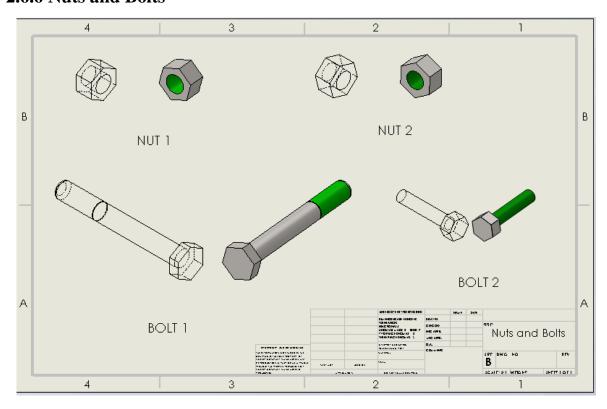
3-Dimensional Sketch of Nuts and Bolts
